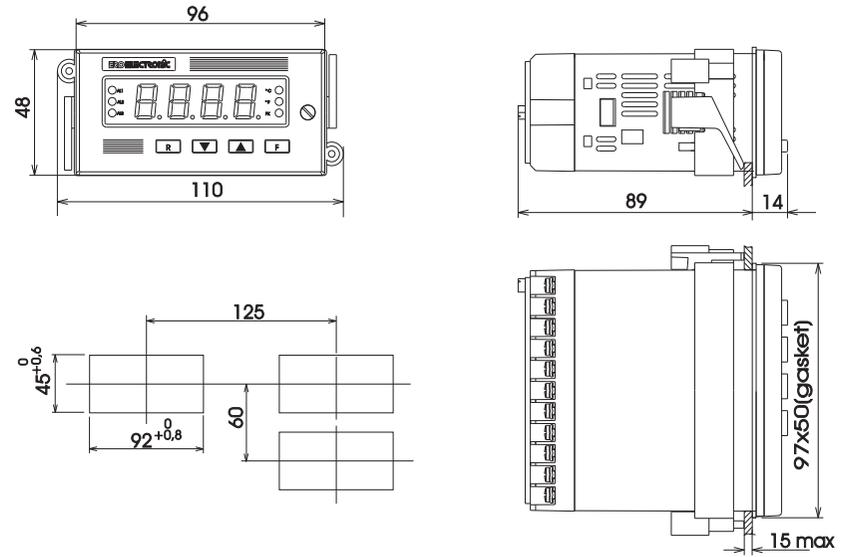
A TIS - OUTLINE AND CUT-OUT DIMENSIONS
